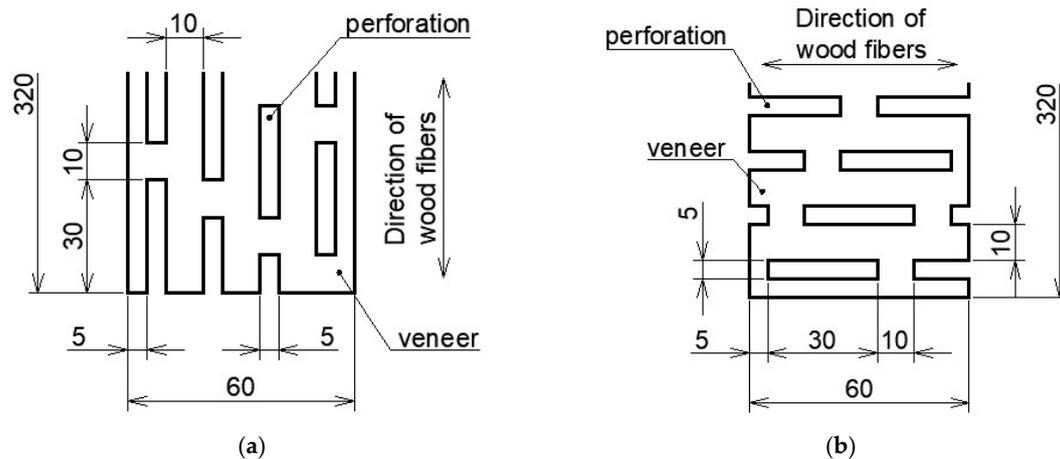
Arrangement of perforations in veneer with respect to direction of wood fibers. (a) Parallel to the longer dimension of veneer. (b) Parallel to the shorter dimension of veneer.
